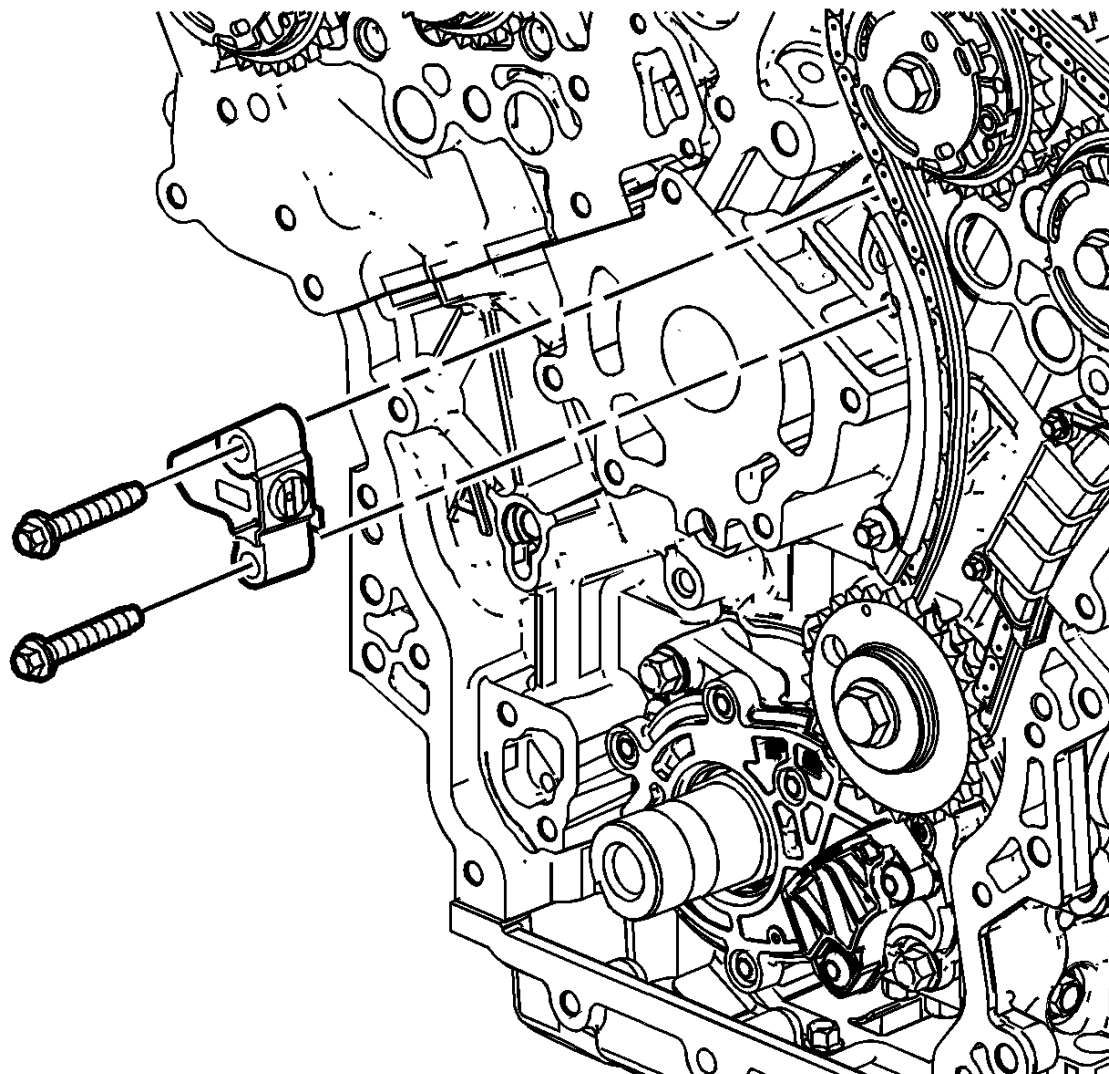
Location Of Left Bank Secondary Camshaft Drive Chain Tensioner
